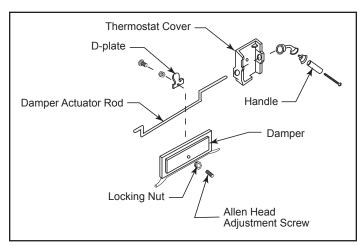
Tighten the damper adjustment screw for a snug seal.
